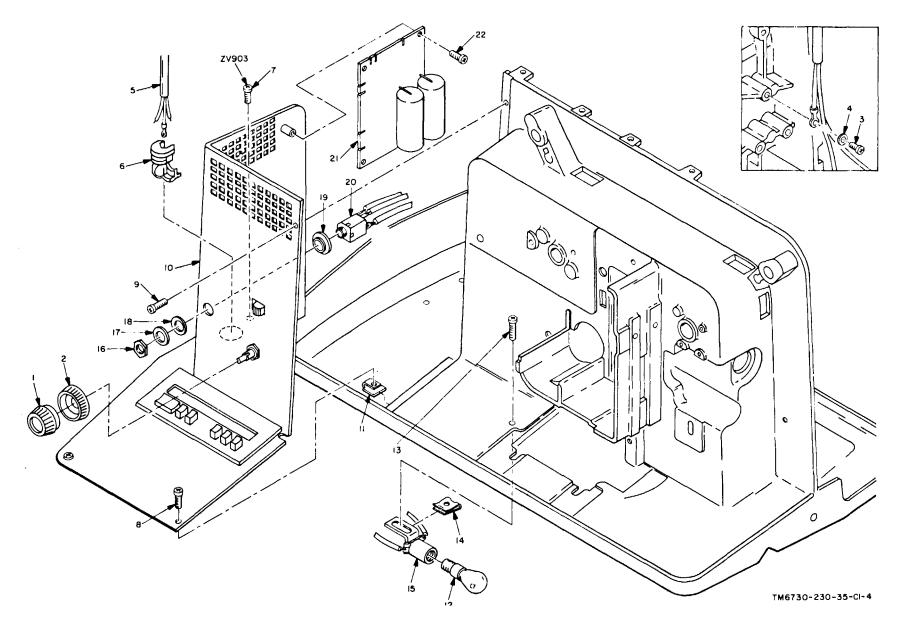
Amplifier cover assembly and threading lamp components, exploded view (AS-25A1).
